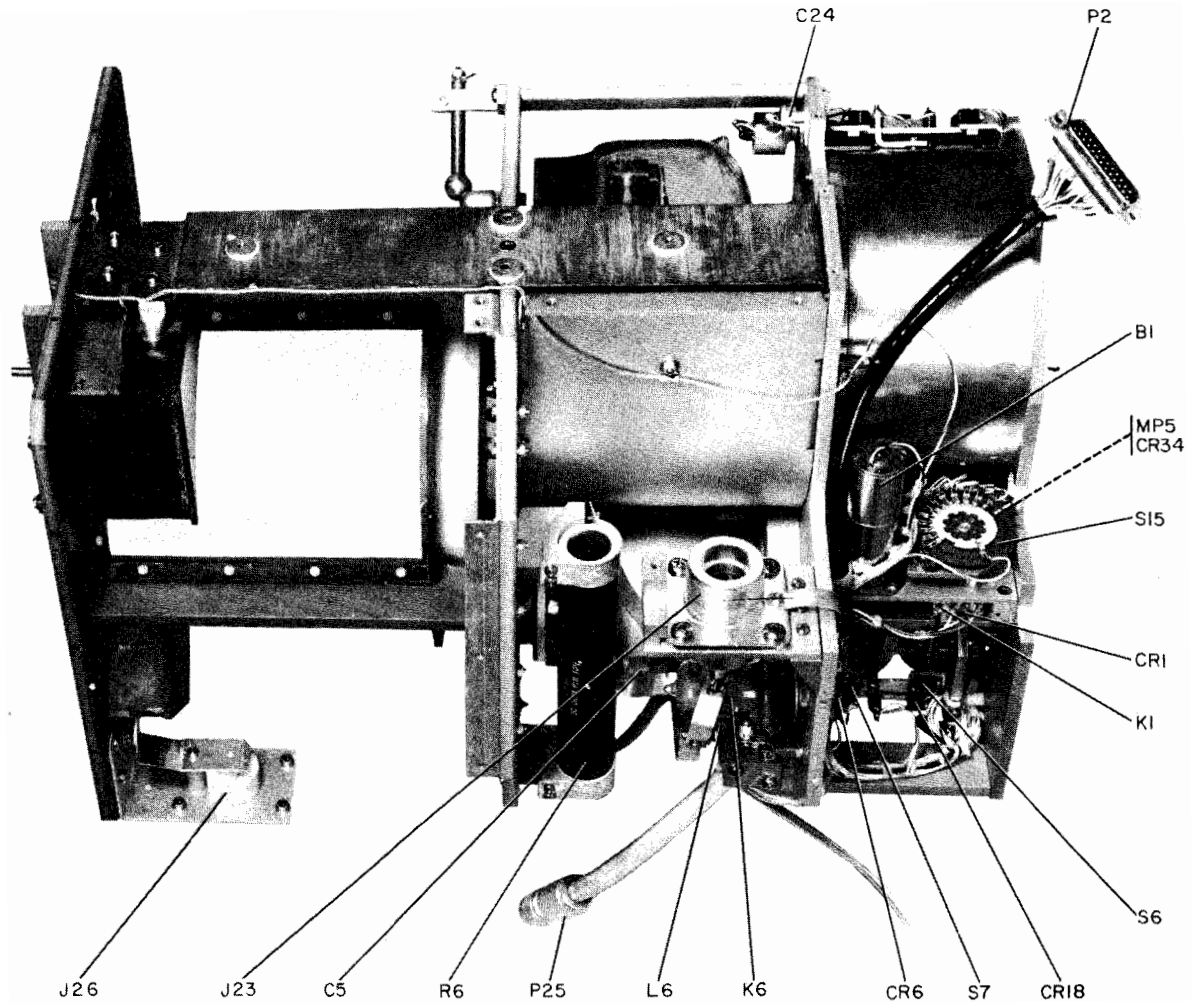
Series-Parallel Circuit Assembly, Parts Location
